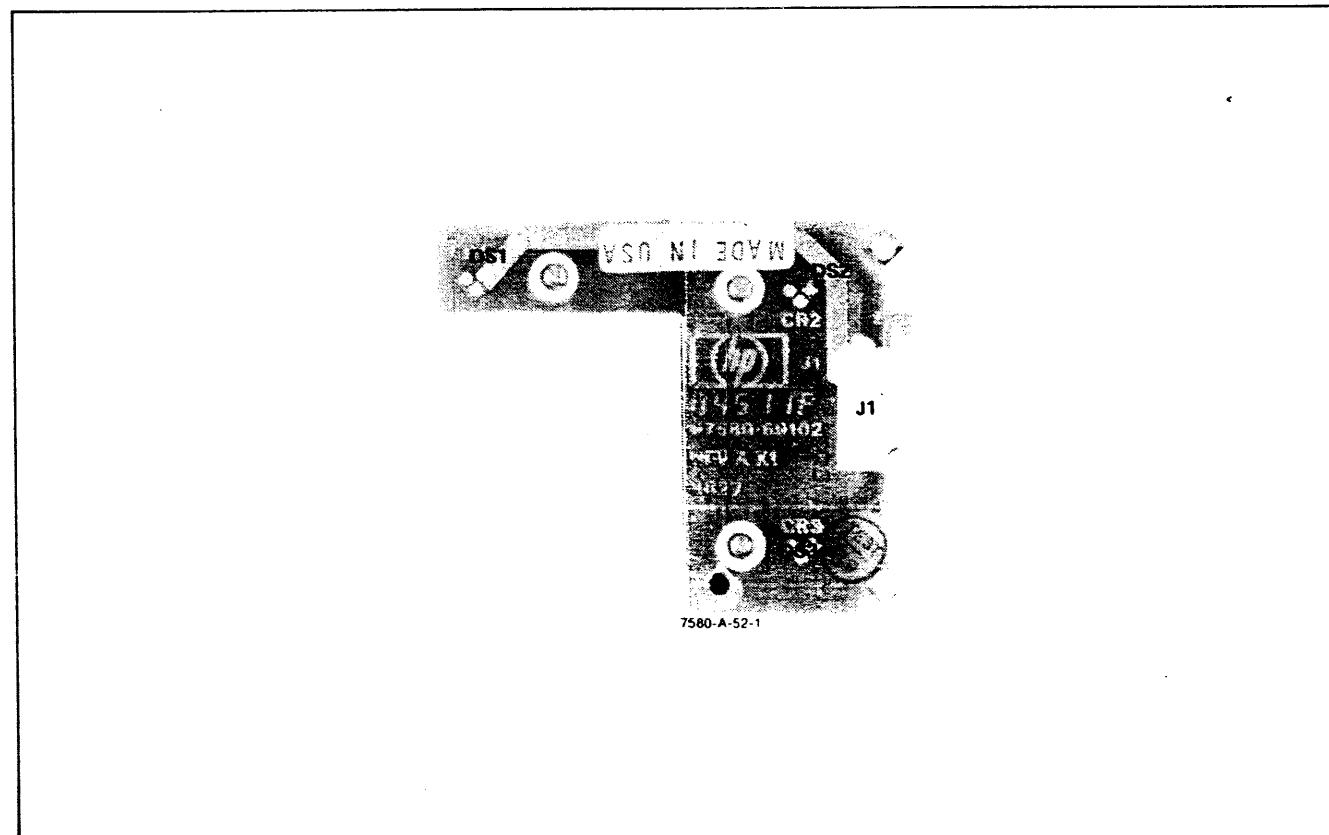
Rear Sensor PCA A12, Component Identification Diagram
